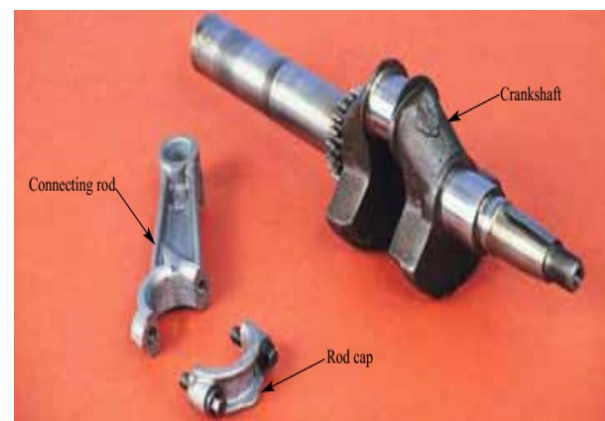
Single-piece crankshafts are most popular in small gasoline engine applications
